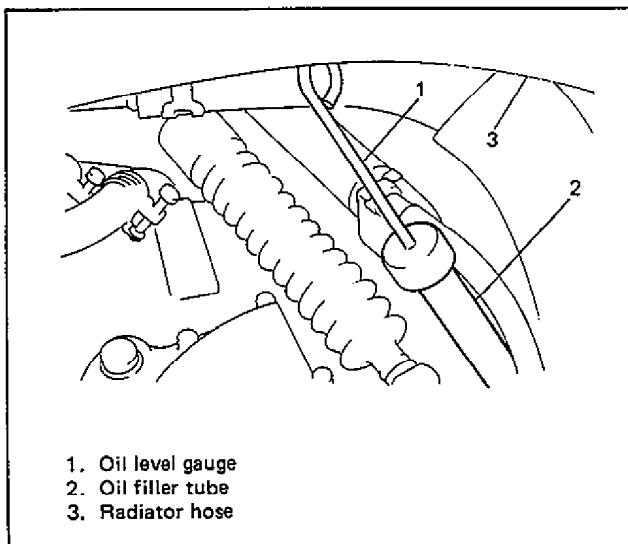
B-68 Oil Level Gauge and Oil Filler Tube
